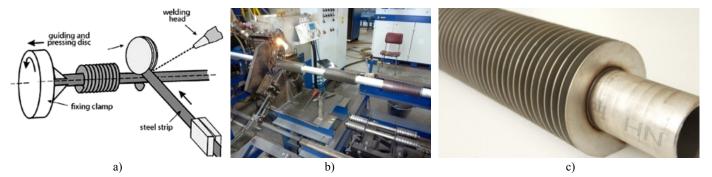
Laser welding station for the welding of finned tubes, developed in the company Energoinstal SA: a) general diagram of the welding system [19], b) laser welding of the tubes, c) finned tube
